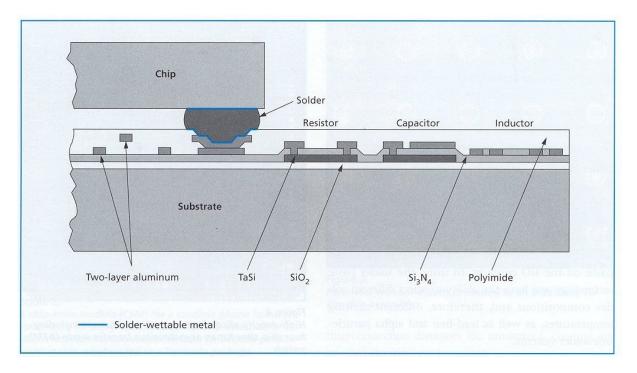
Cross section of an integrated circuit flip-chip assembled to a high-resistivity substrate embedded with high-Q passive components.
